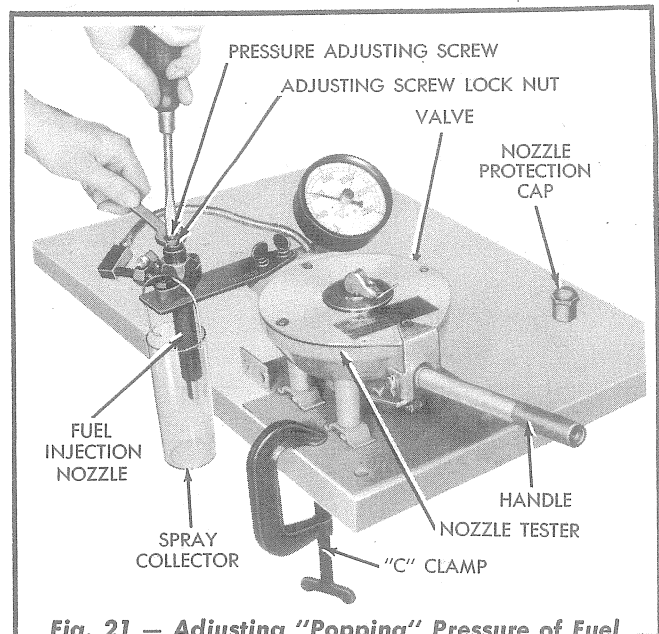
Adjusting "Popping" Pressure of Fuel Injection Nozzle (Tractors Prior to Serial No. 4001)
